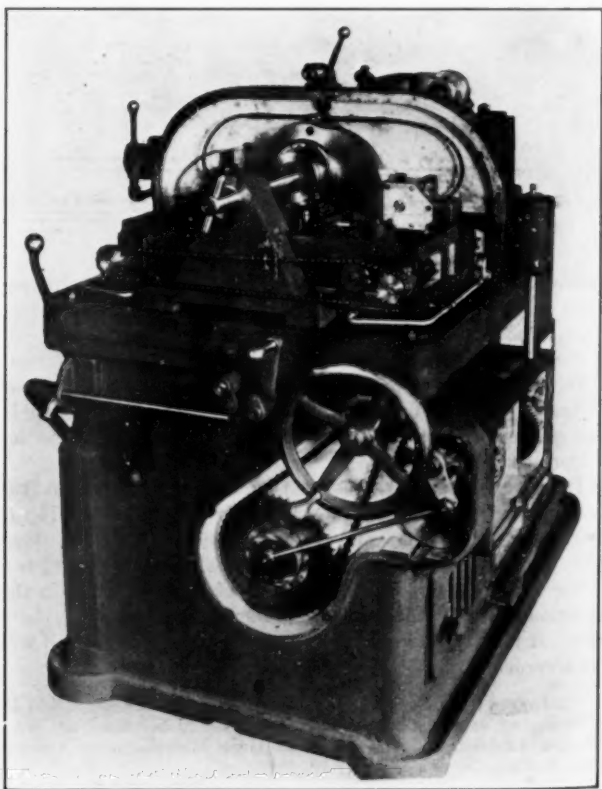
FRONT OF MACHINE WITH GUARDS REMOVED
